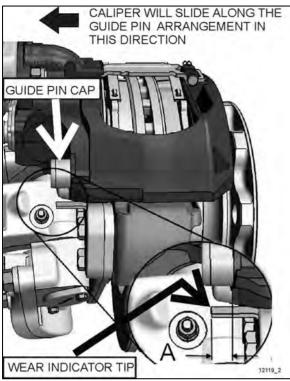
BRAKE PAD WEAR CHECK ON THE FRONT AND TAG AXLE 12119
